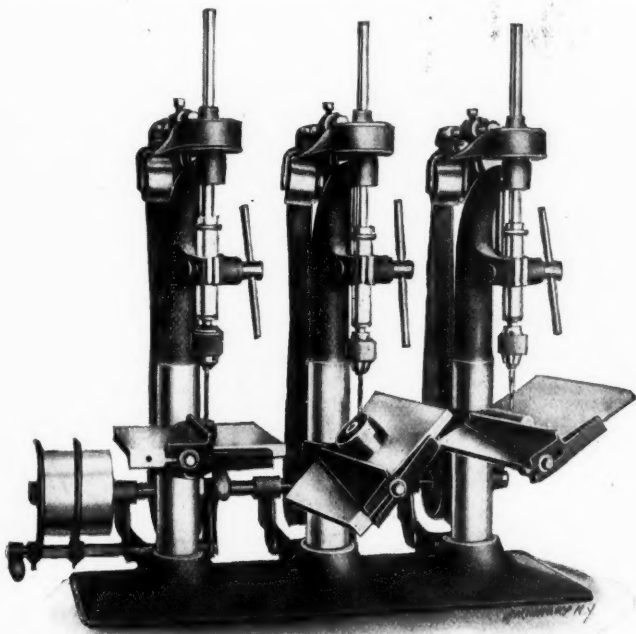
Rockford Three-spindle Bench Drill, showing Use of Tilting Table and Adjustable Gage
